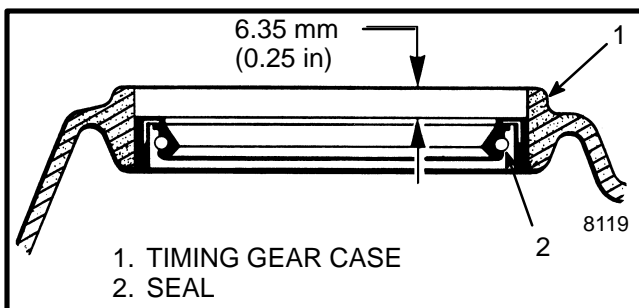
CRANKSHAFT SEAL FOR TIMING GEAR CASE
